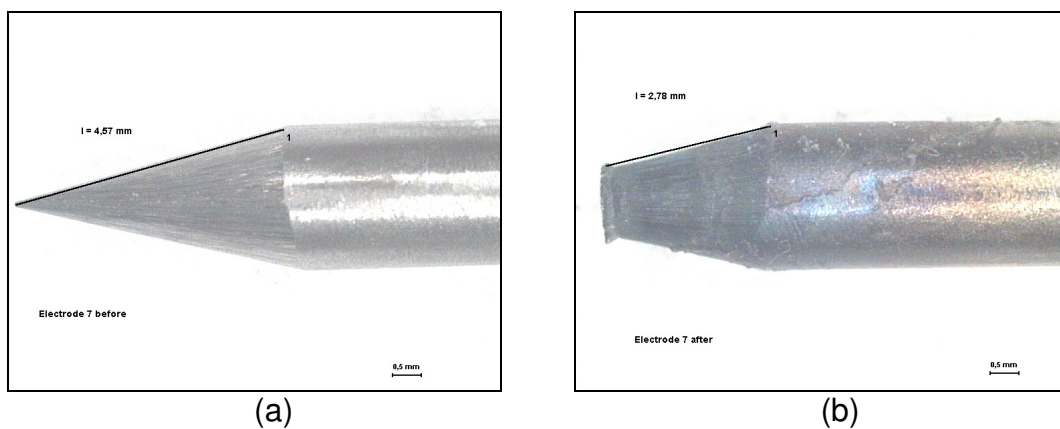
Electrode 7 used for experiment number 7: (a) before welding; (b) after welding.
